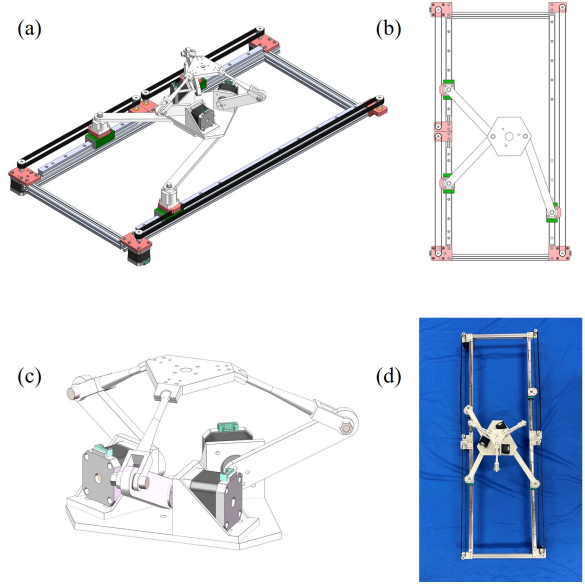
(a) CAD design of the proposed robot. (b) Bottom layer: a sliding rail parallel module. (c) Top layer: a 3-RRS parallel module. (d) Prototype of the proposed robot.
